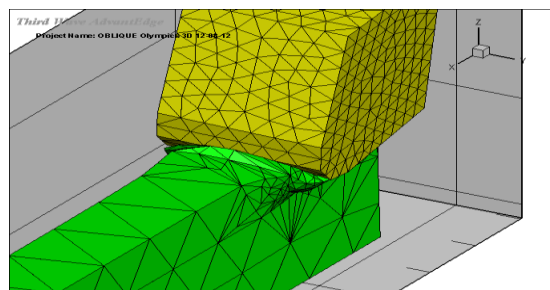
The Cutting Tool Initially Indents the Workpiece
